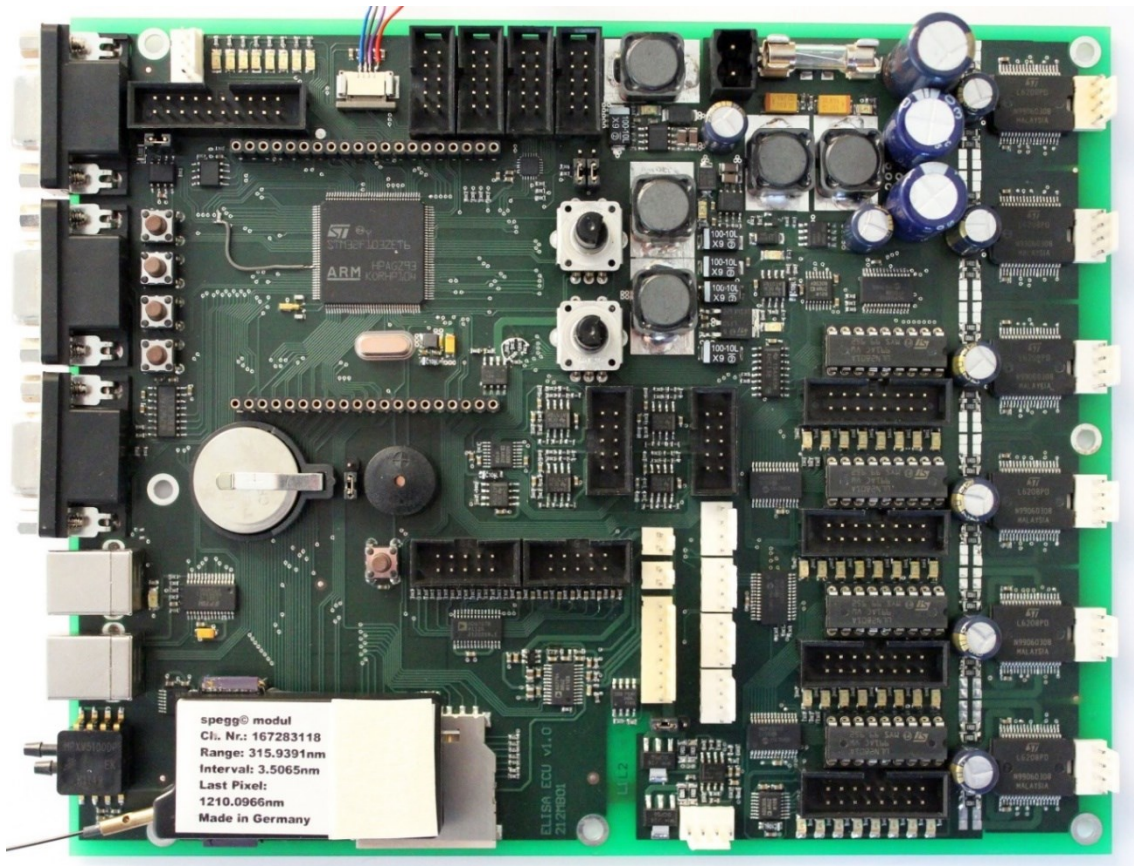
Assembled top side of the control unit PCB including the spectrometer module
